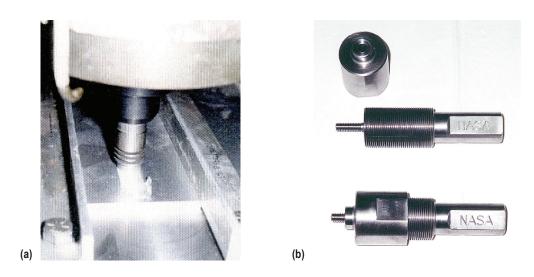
(a) FSW and (b) the pin tool's geometric design.
